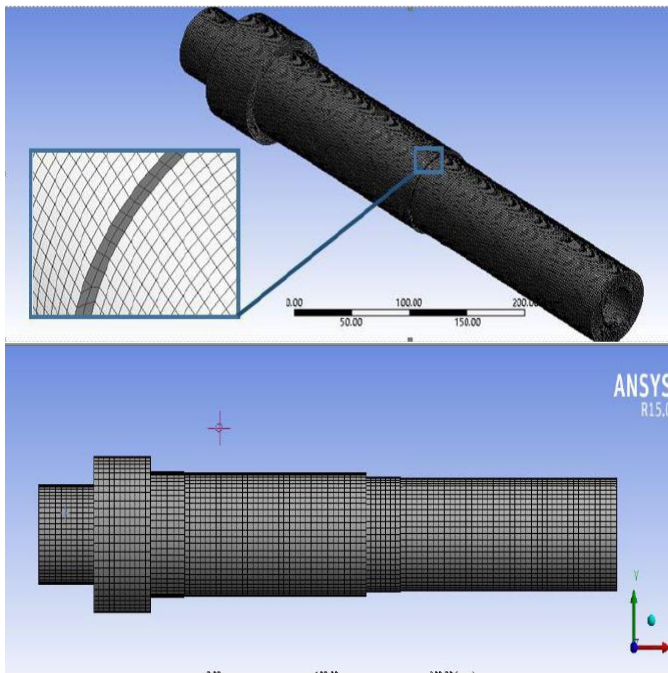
Initial and final hexahedral mesh of lathe spindle.
